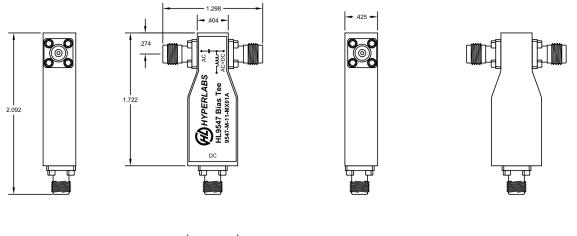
HL9547 with SMA DC bias port Mechanical Drawing
